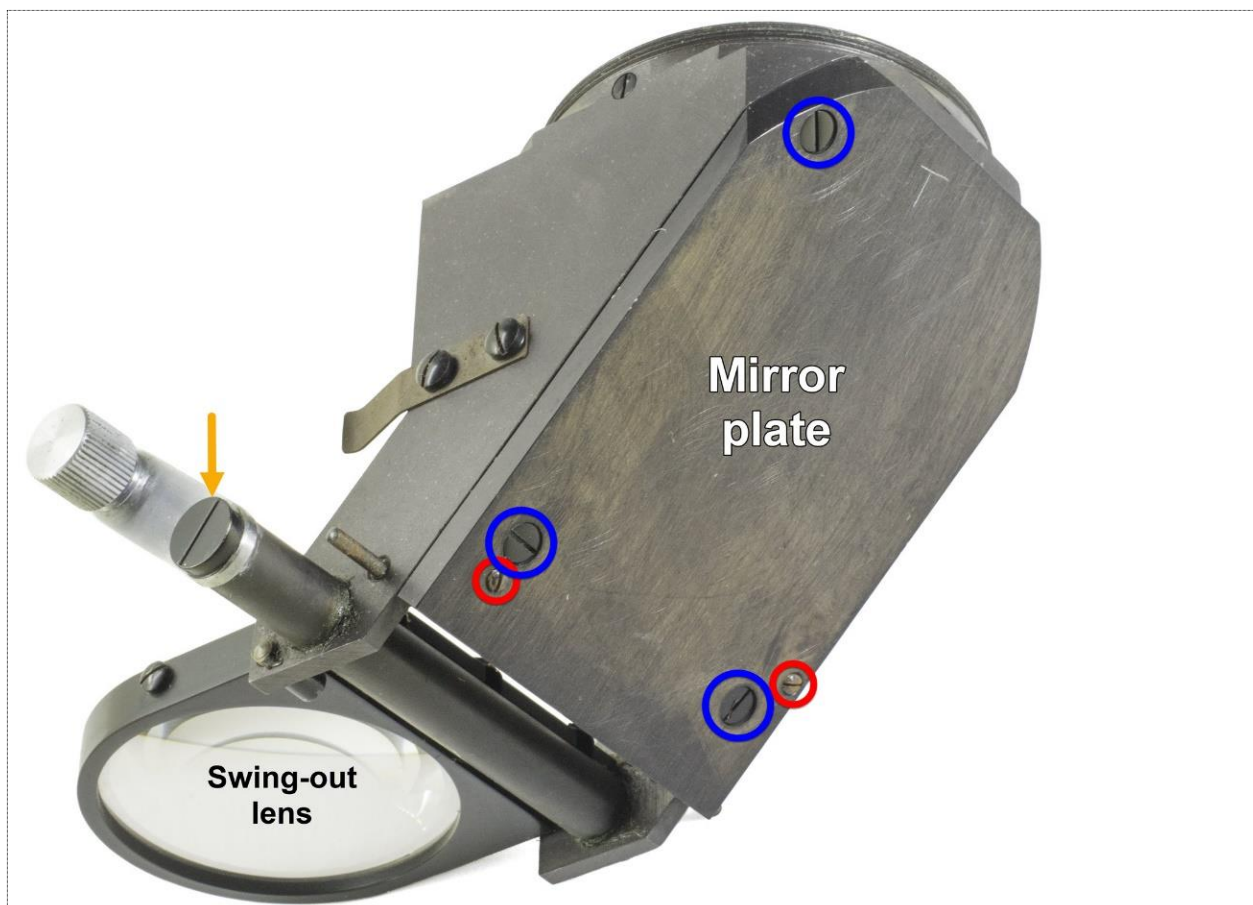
The removed mirror & swing-out lens holder - view obliquely from below. The lens is in its swing-out position. The blue circles indicate the screws that attach the mirror plate to the holder. The red circles indicate grub screws that support the mirror collimation.
